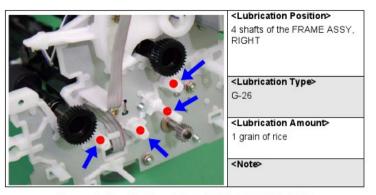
Shafts of the FRAME ASSY, RIGHT
